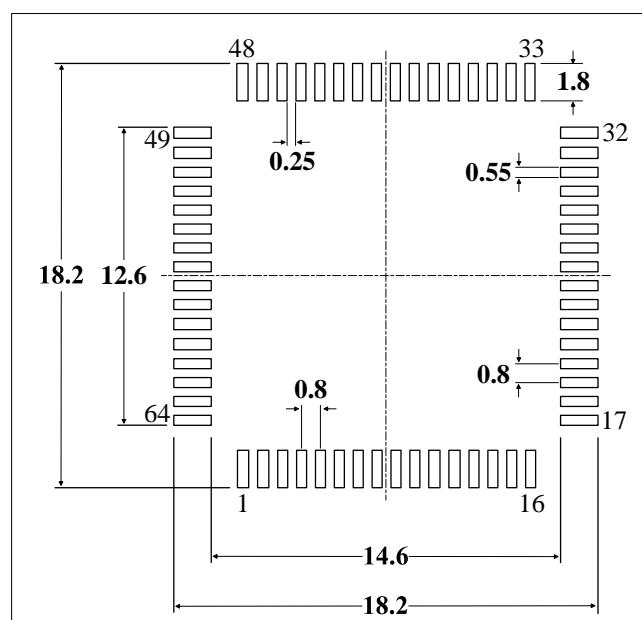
Suggestions for LQFP64 (14x14mm) package solder pads⁽¹⁾
